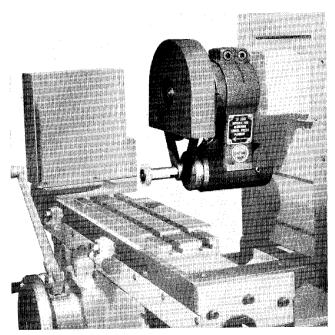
High Speed Surface Grinding Attachment. Wheel arbors and grinding wheels are furnished at extra cost.
